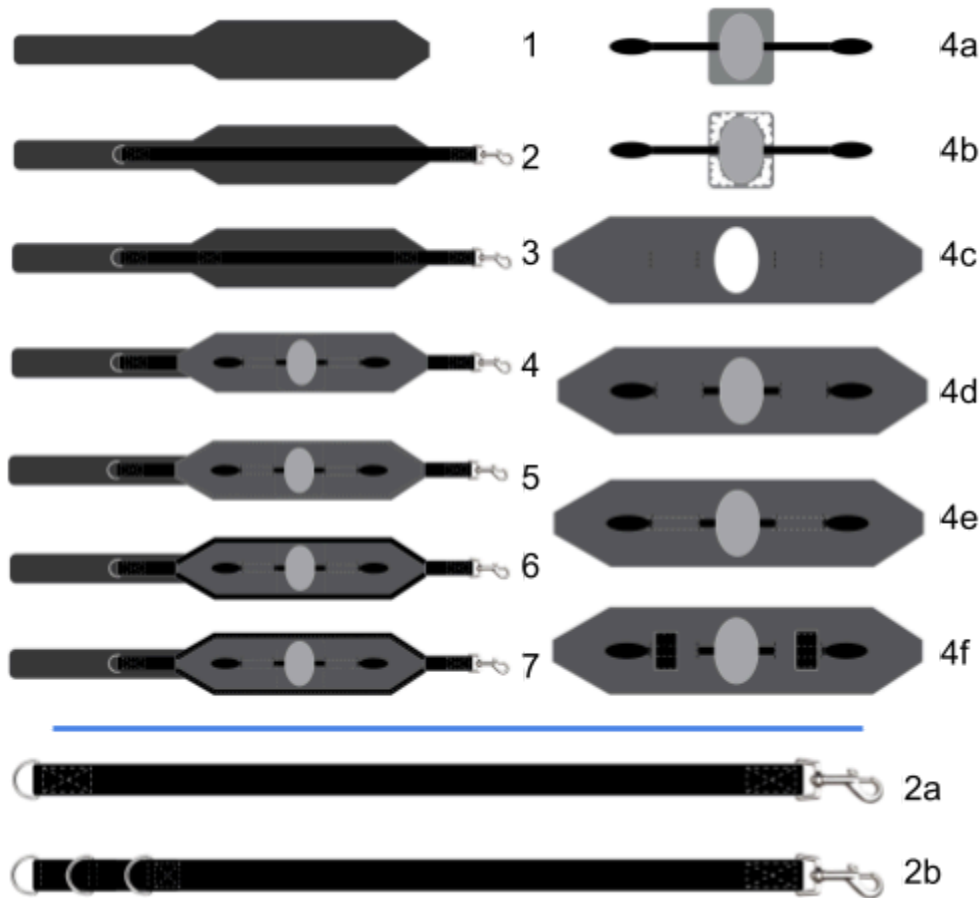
The drawing above depicts the cover, electronics and baseplate that will be used in the harness.
